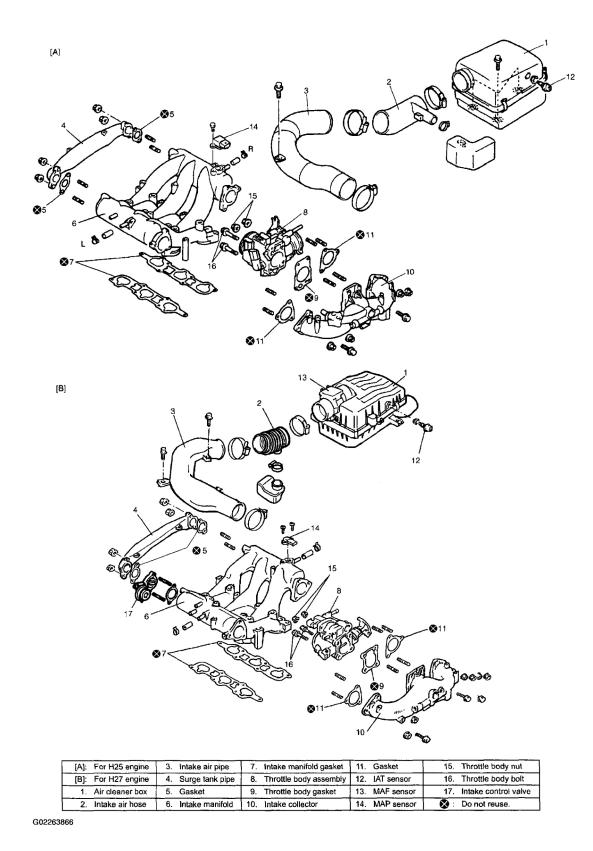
Exploded View Of Throttle Body & Intake Manifold Components
